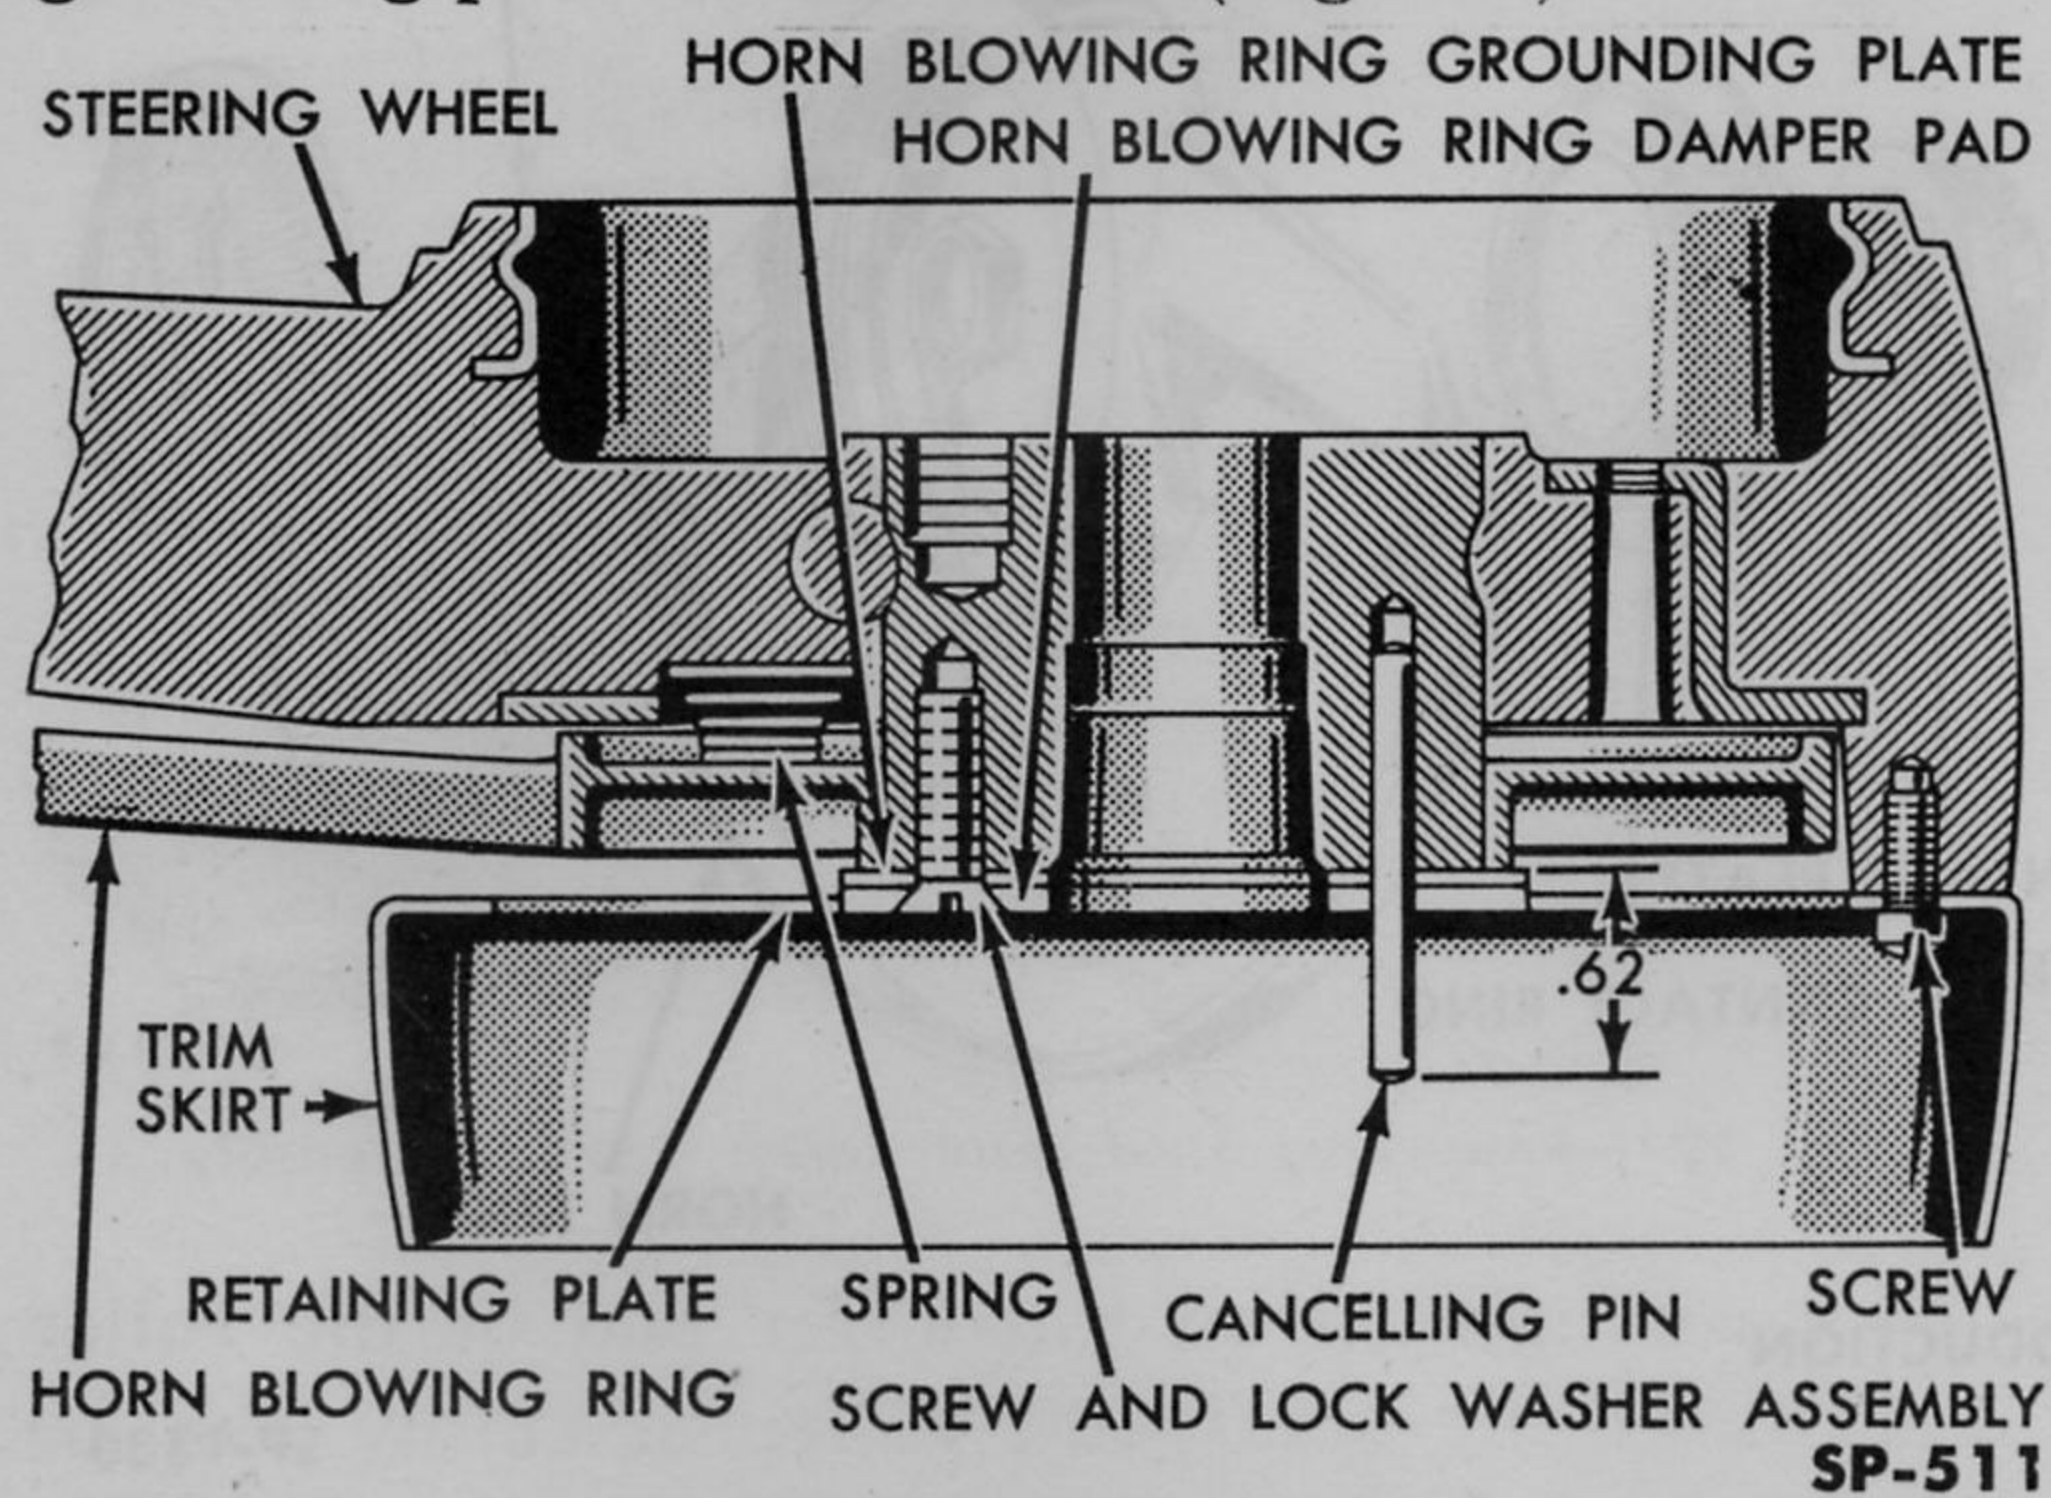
Steering Wheel and Horn Ring Assy.—Sectional View—Frazer
